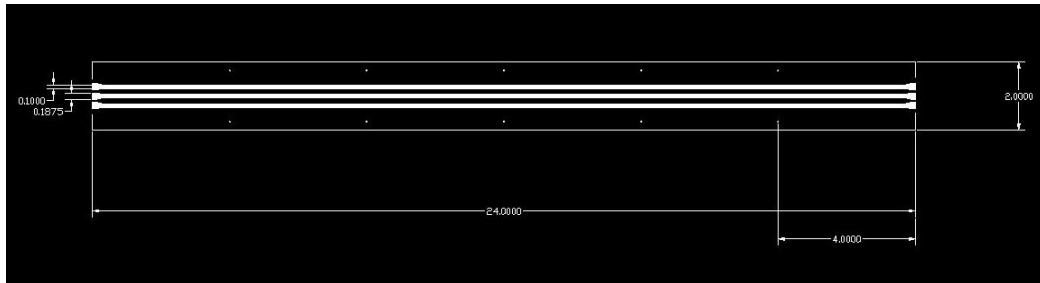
AutoCAD drawing used for printing circuit boards.
